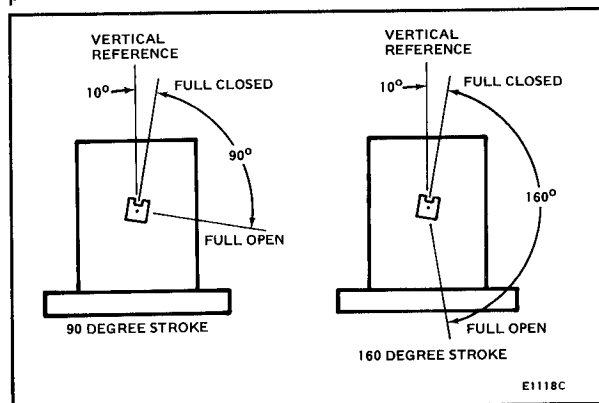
LIMITS OF MOTOR SHAFT ROTATION VIEWED FROM POWER END.
